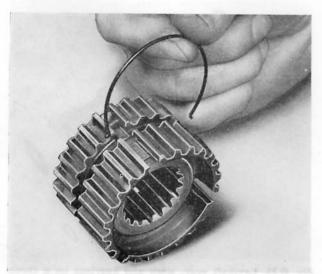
Assembling the sliding key spring with two turned-out ends to the first and reverse hub
